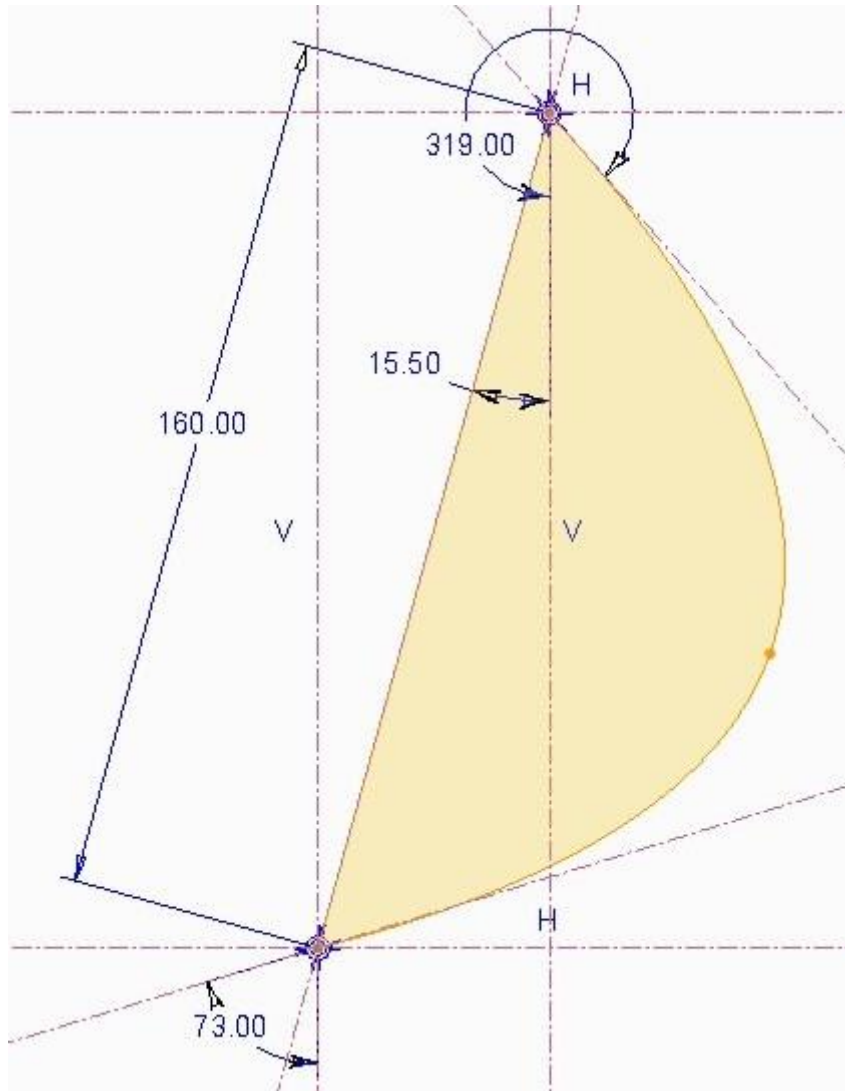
Calculating the Camber Length of the Rotor Blade
